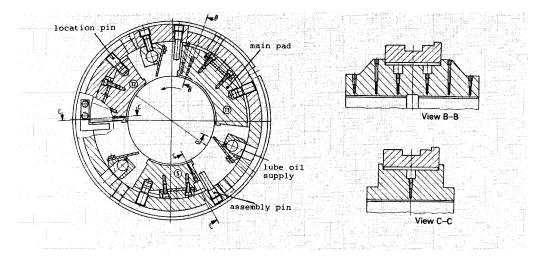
MAAG radial tilting pad bearing. (Source: MAAG Gear Company.)
